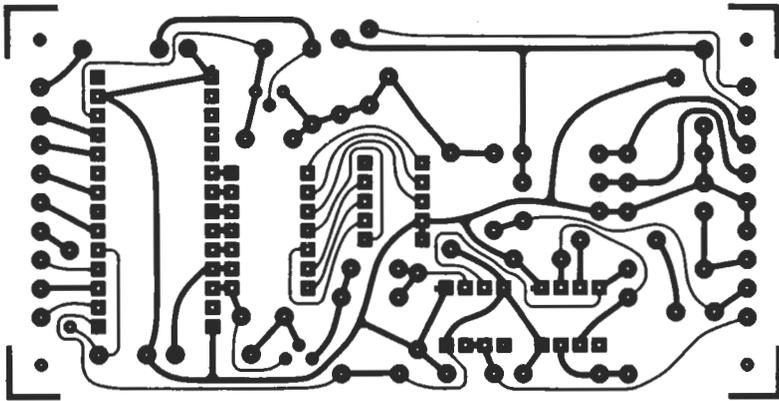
Actual-size etching and drilling guide for printed circuit board is shown at top. Component placement diagram is directly above.
